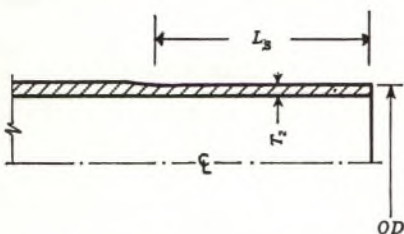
3-48 in. Standard Mechanical-Joint Fittings Dimensions (See Table 10.1)
